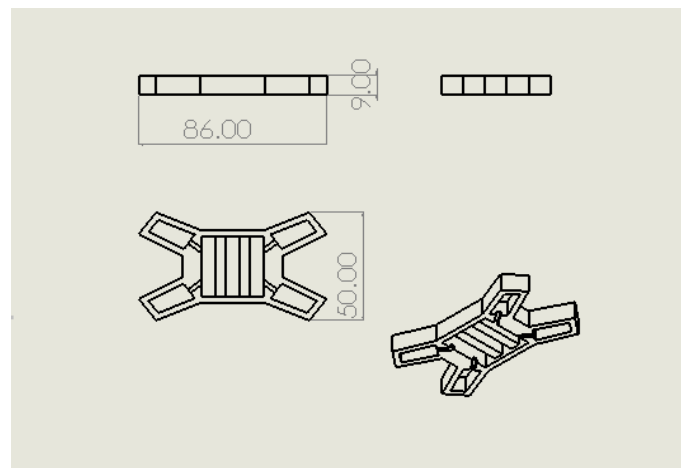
The dimension of the body of quadrupedal soft crawling robot (in mm)
